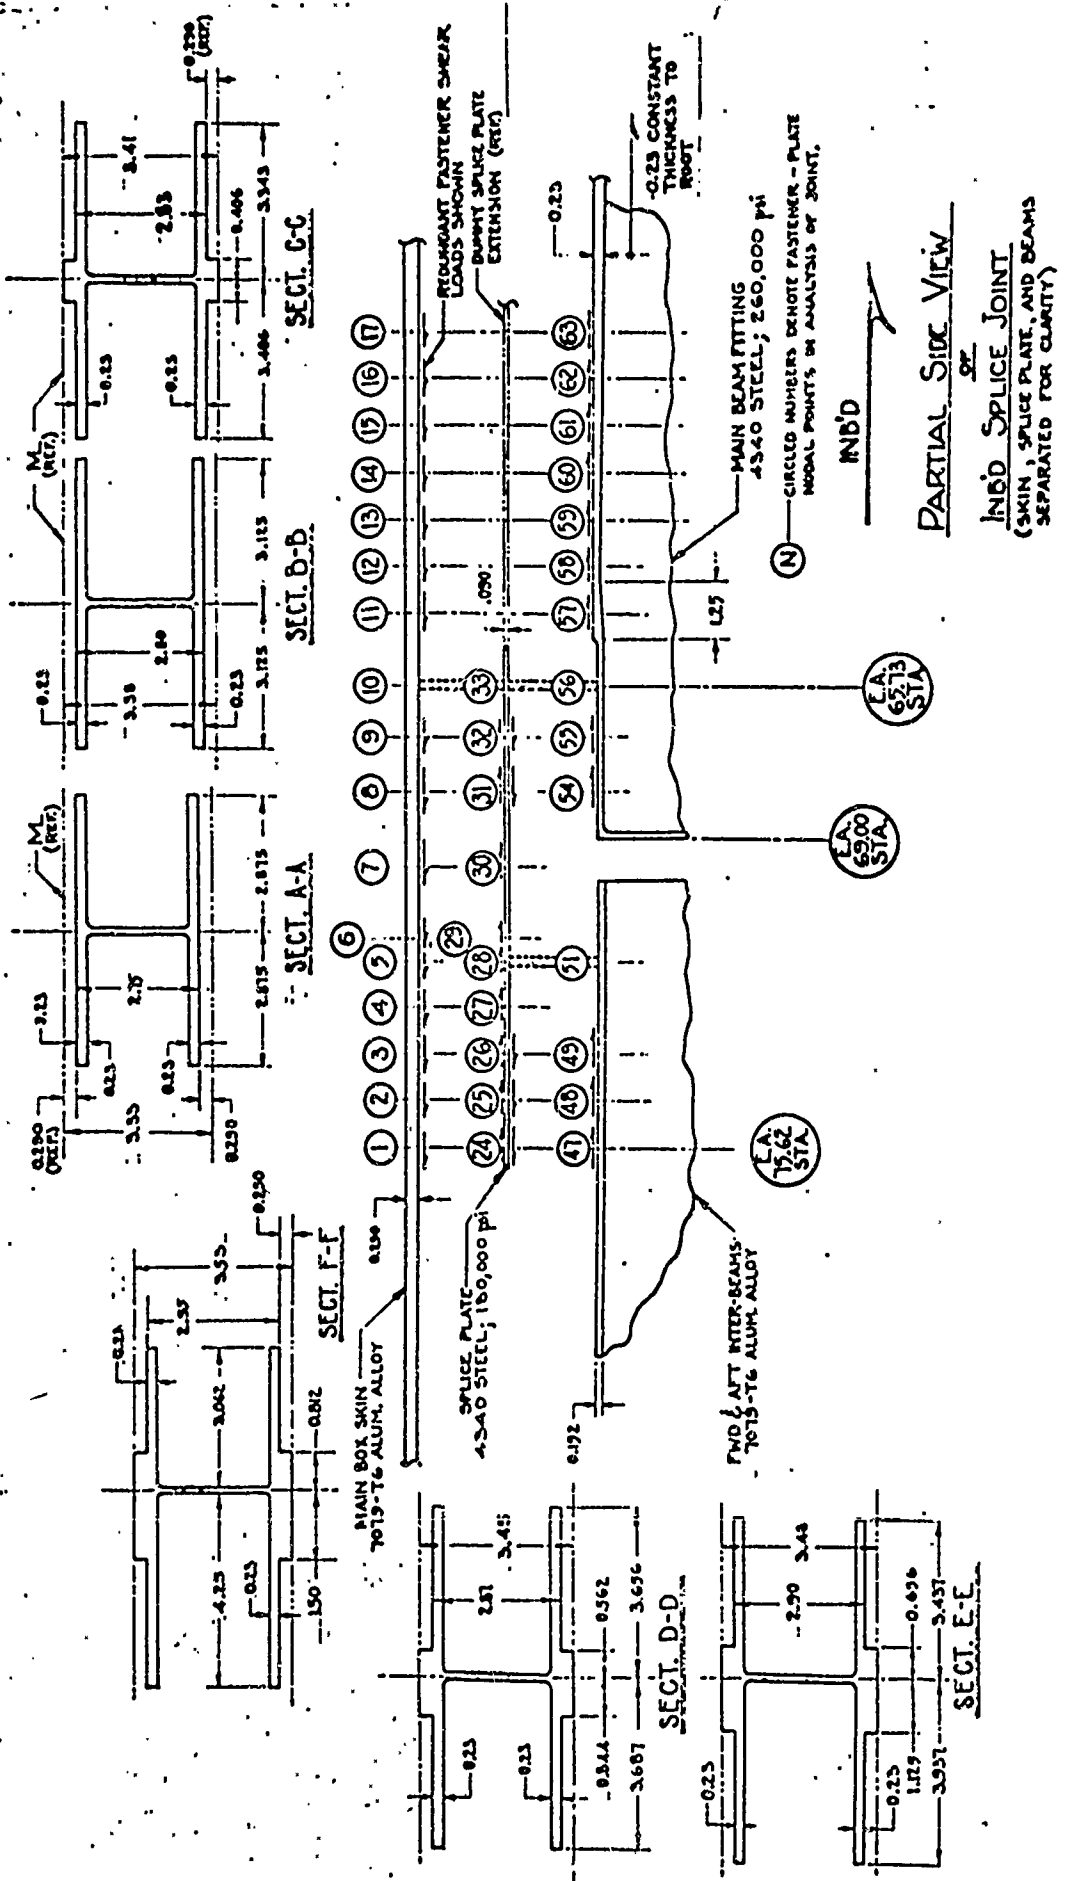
Inboard Splice Joint And Main Beam Cross-Sections
